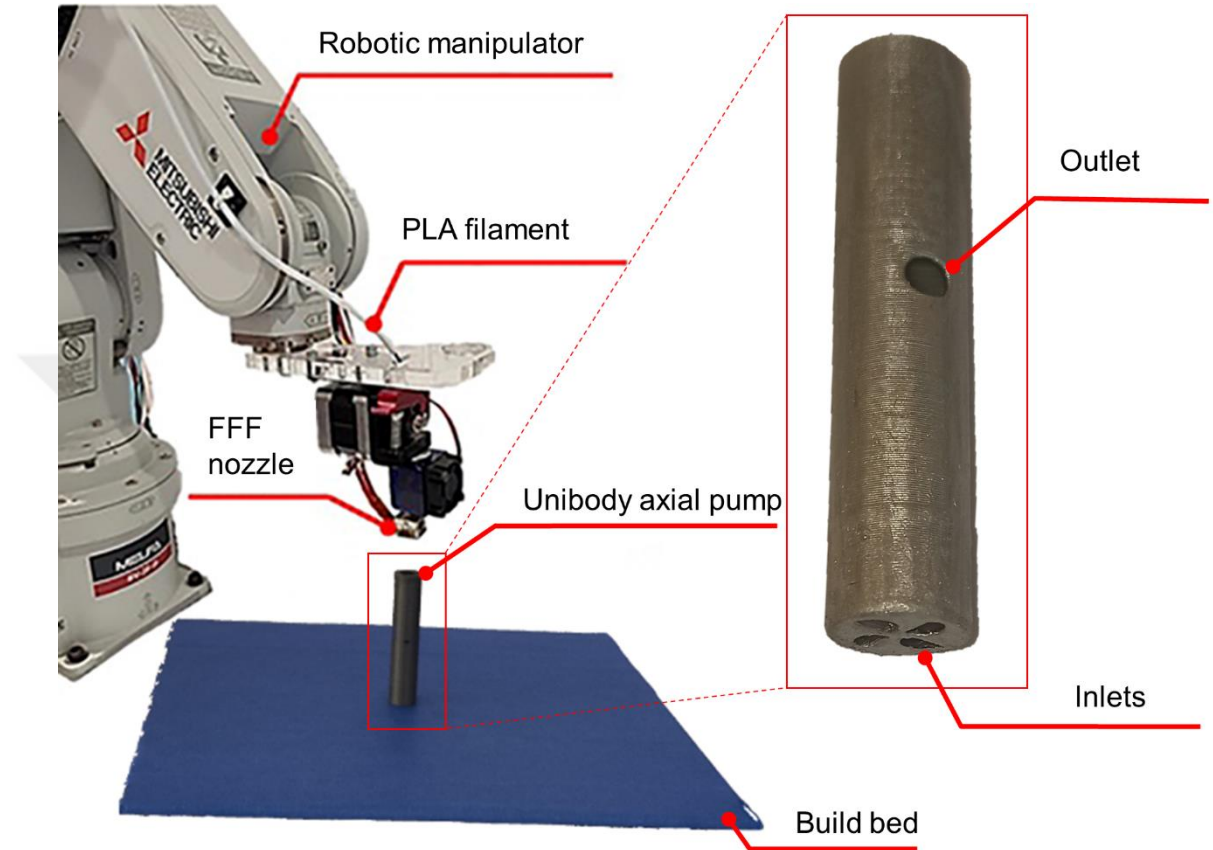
Robotic additive manufacturing setup utilized for the manufacturing of test specimen
